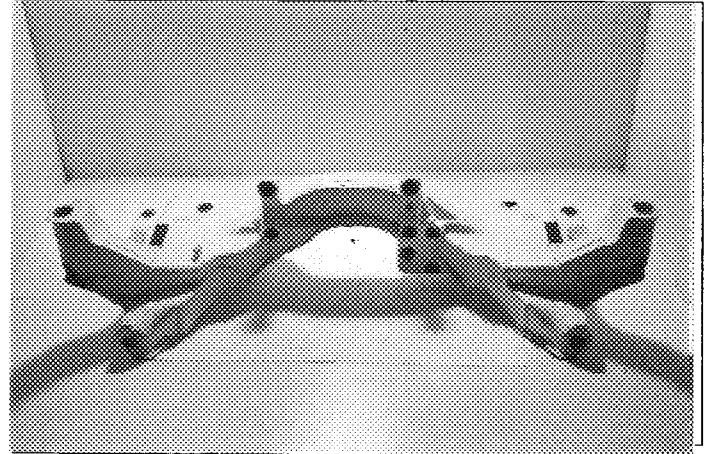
RESTRAINT STRAP FOR FRONT SUBFRAME
